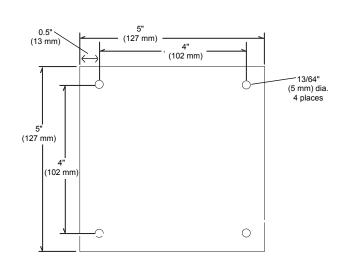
Mounting Dimensions – Argon-Hydrogen Manifold
